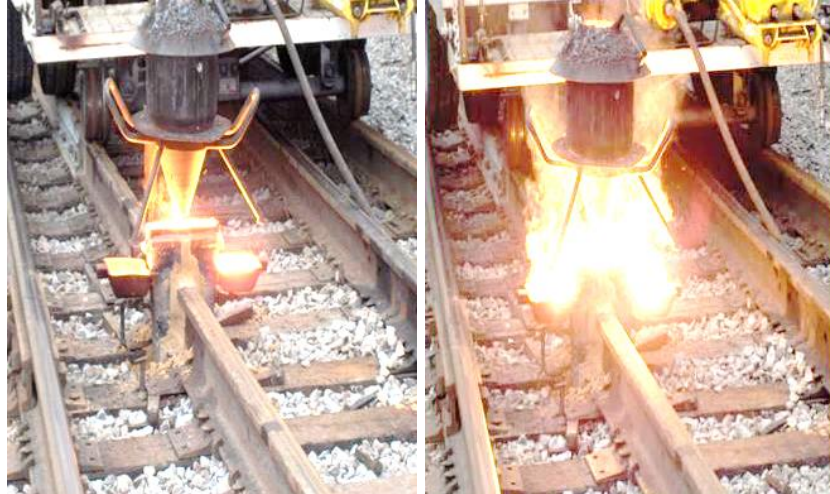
Thermite welding of railways- From the reference ³²
